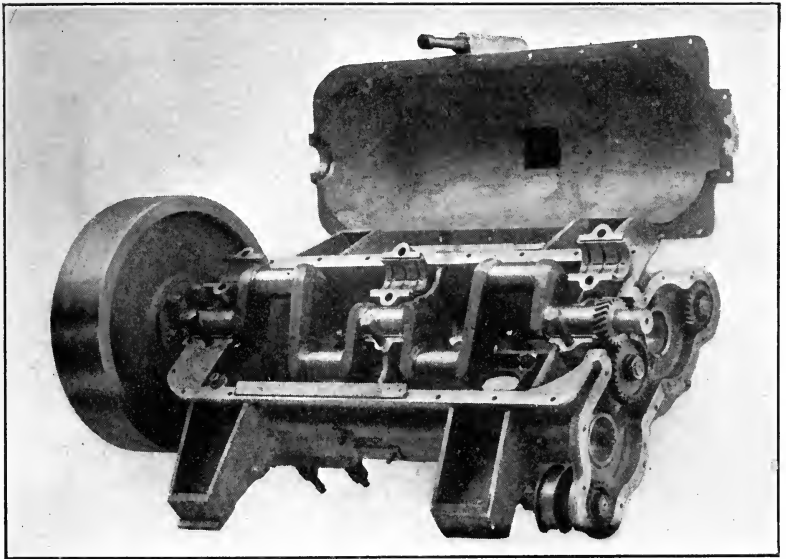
Crank Case of Corbin "40" Power Plant Made in Two Halves. Crank-Shaft Bearings and Caps Secured to Upper Half, which also Has Supporting Arms Cast Integral. Lower Portion of Crank Case Simply Acts as Oil Container. This is the Common Construction.
